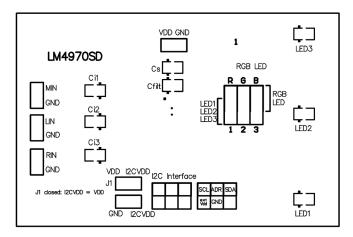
Recommended NHK PCB Layout: Top Silkscreen
